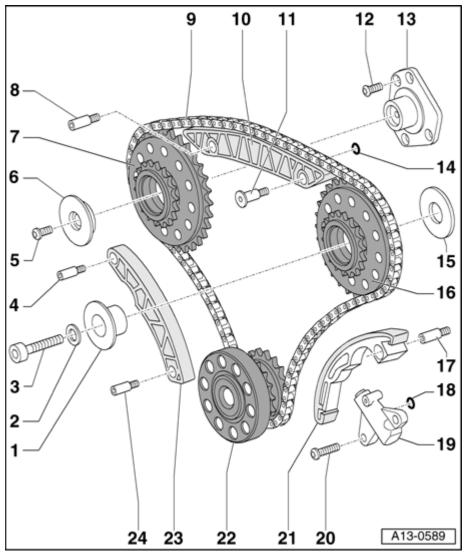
Drive Chain For Timing Mechanism, Component Overview
